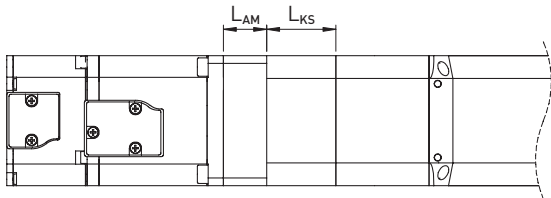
Motor connection of linear modules HM-S without belt drive
